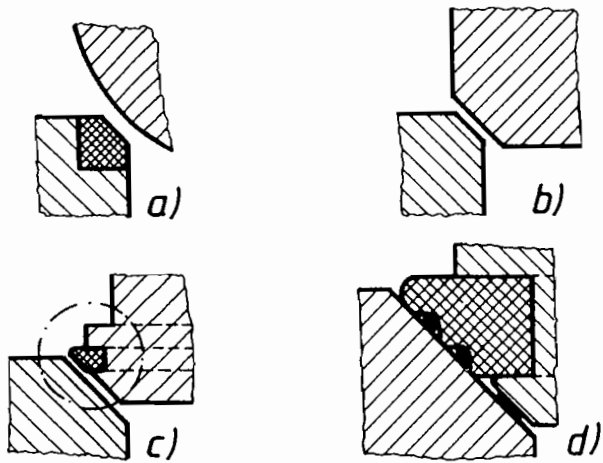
Sealing Bevel in Automatic Pump Check Valves. a) elastic, b) rigid, c) supporting seal, d) supporting seal (detail).
